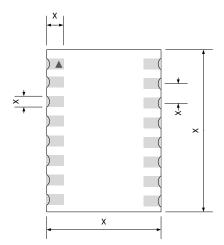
Prototype sample package (Bottom view). Shaded areas are metal leads on bottom of PCB. Note that Pin 1 lead is rounded.
